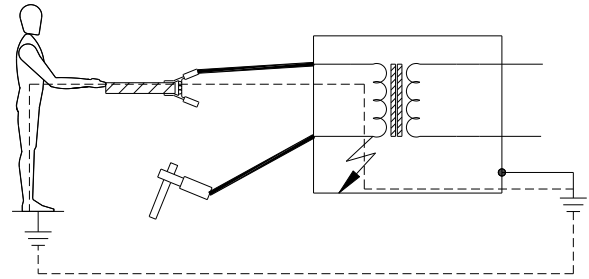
Failure of the basic insulation of the welding circuit
